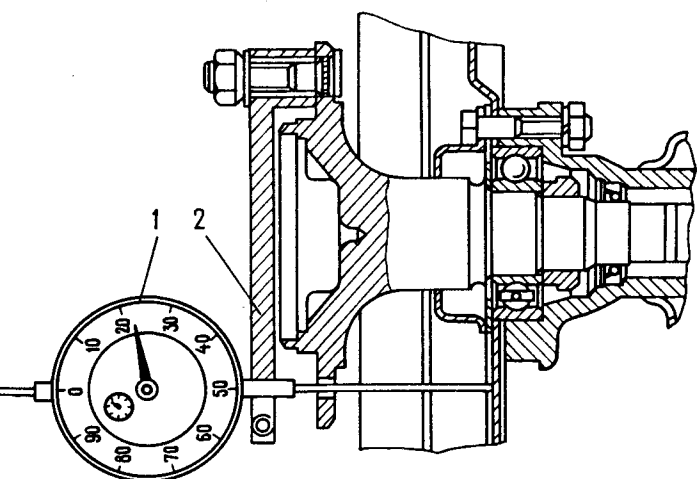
Measuring Axle-Shaft End Play with Wheel and Brake Drum Removed:
